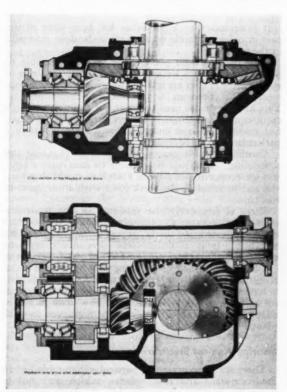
Axle drive developed by Maybach Company. Top view shows cross section of the axle drive. Bottom view shows axle drive with additional spur gear.
